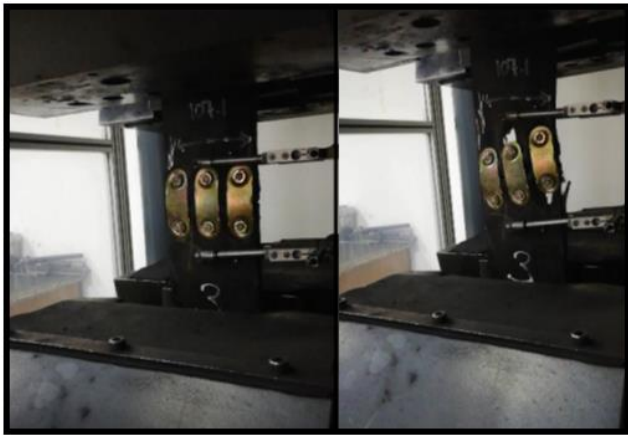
Tensile test images of the belt joined by mechanical splicing method
